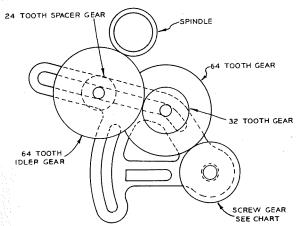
Gear set-up for 4 through 7 threads per inch.
